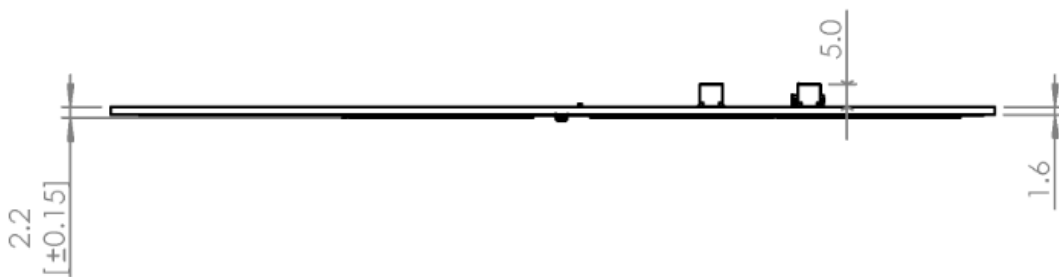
Solar Panel 40P6 - Side View (dimensions in mm)
